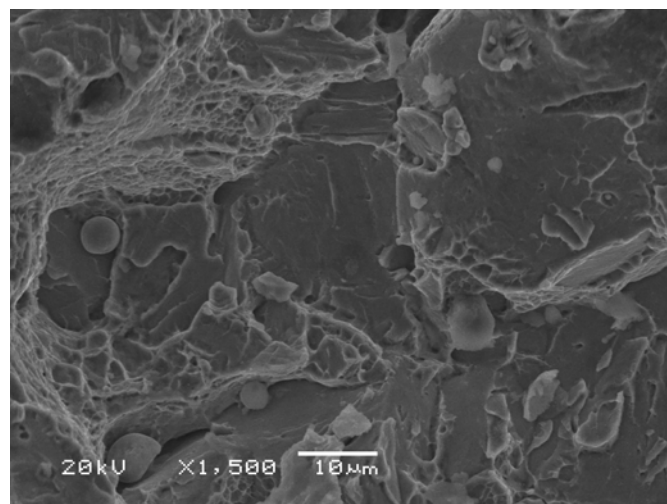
Fractography of the region close to the screw thread, where the unmistakable intergranular fracture is seen.
